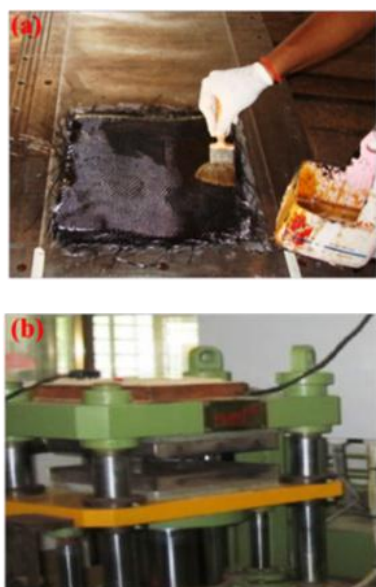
(a) Hand lay-up process and (b) Compression moulding machine
